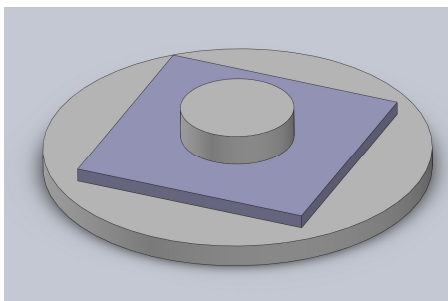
Electrode-elastomer ensemble drawn in SolidWorks
